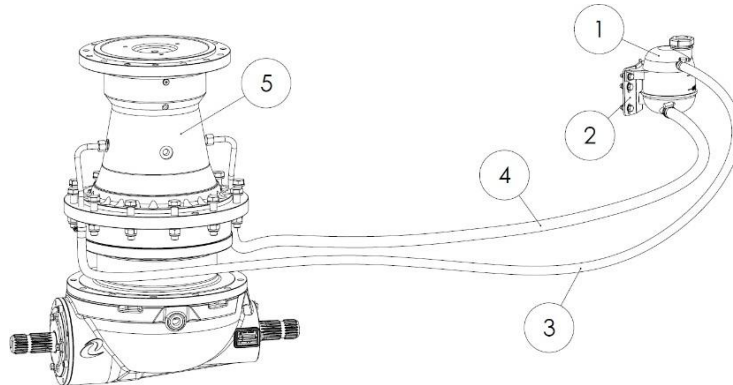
Gear lubrication system: 1 - oil expansion tank, 2 - tank fixture, 3 - supply line, 4 - venting line, 5 - planetary gear
